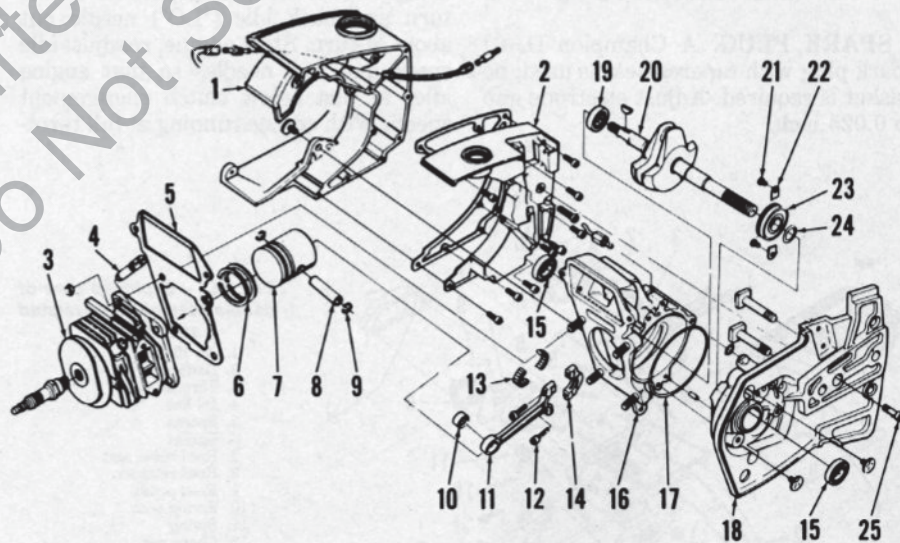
Exploded view of typical engine assembly. A head land piston ring is used on EZ Automatic model in place of rings (6) shown.
